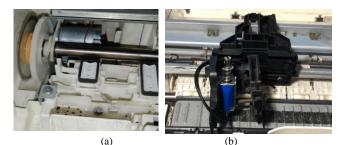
(a) Gear system; (b) Solenoid Mounting.
